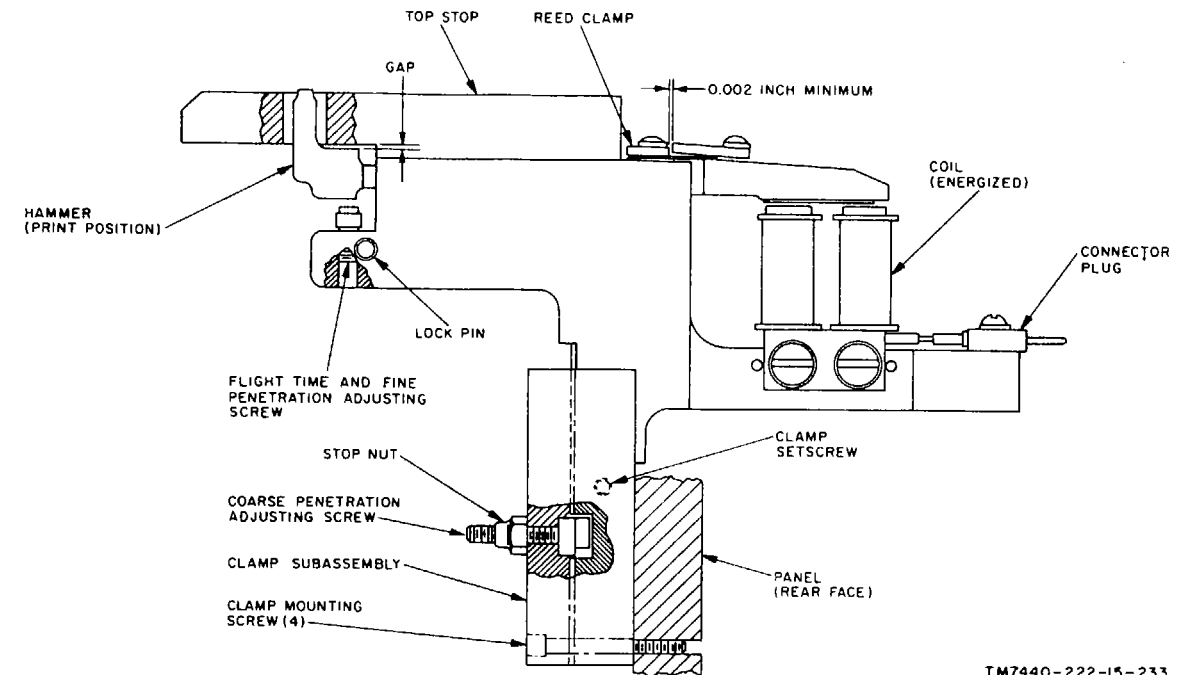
Coarse and fine penetration requirements of hammer module assembly.
